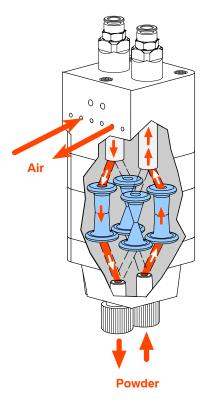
Left Side Drawing In, Right Side Dispensing Note: Rear, left view of pump.
